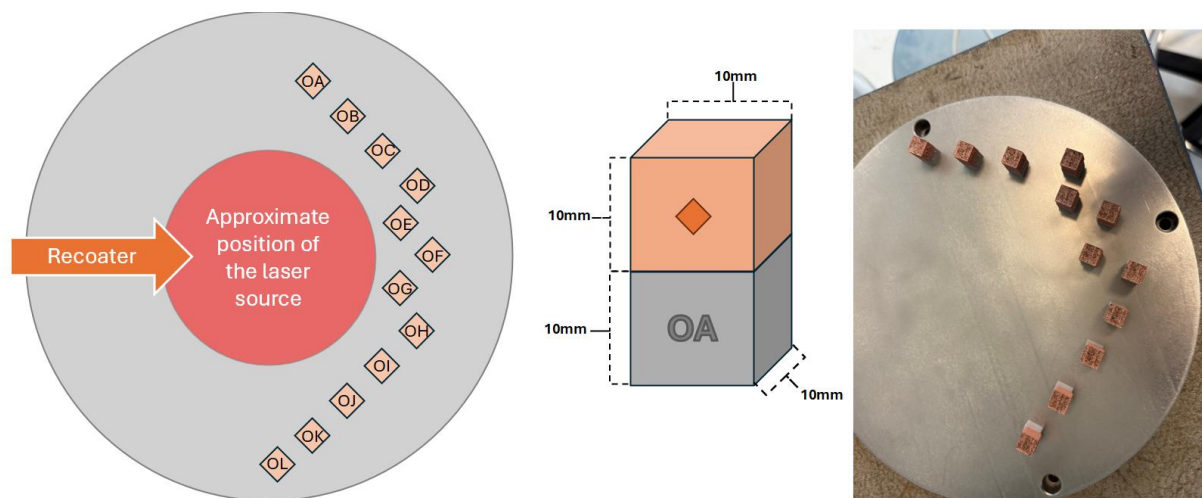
Layout and dimensions of the 316L–CuCrZr parts used in the preliminary PBF-LB/M parameter optimisation test.
